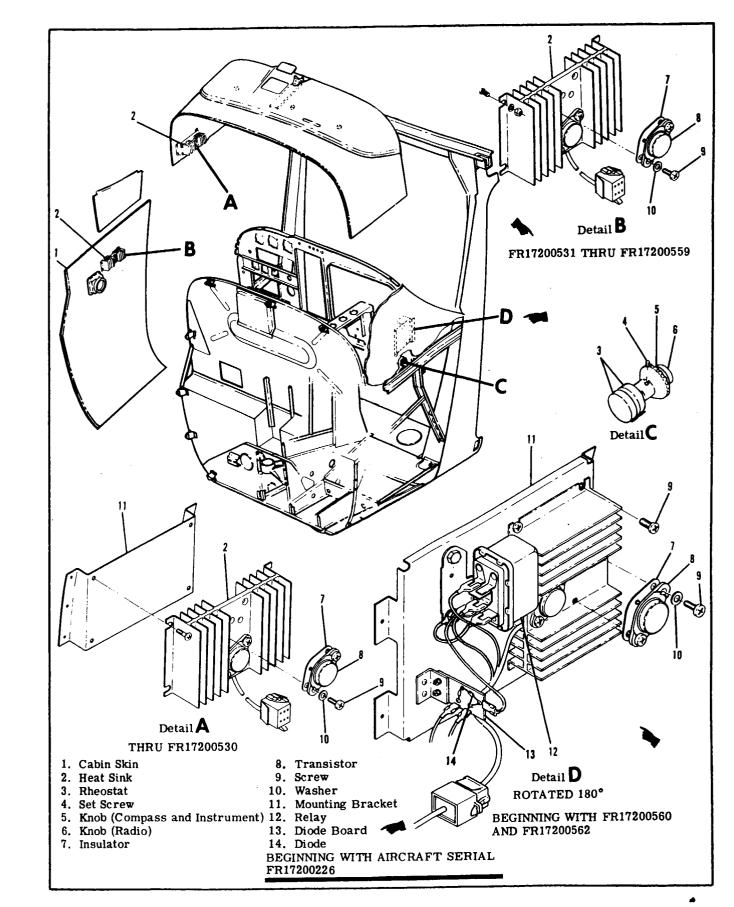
Instrument, Dome and Courtesy Light Installation (Sheet 2 of 2)
